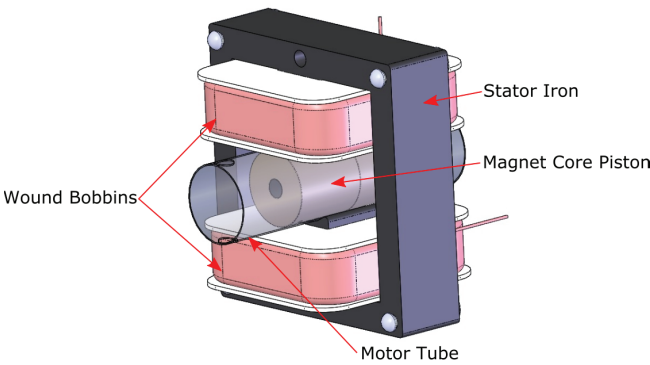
Novel magnetic reciprocating piston, external-stator motor used in the low cost cryocooler. The motor ‘tube’ is made transparent here to show the relationship between the motors external stator and magnet core-piston. Two of these motors comprise the acoustic drive or pressure wave generator portion of the cryocooler and drive its coldfinger (acoustic load).
